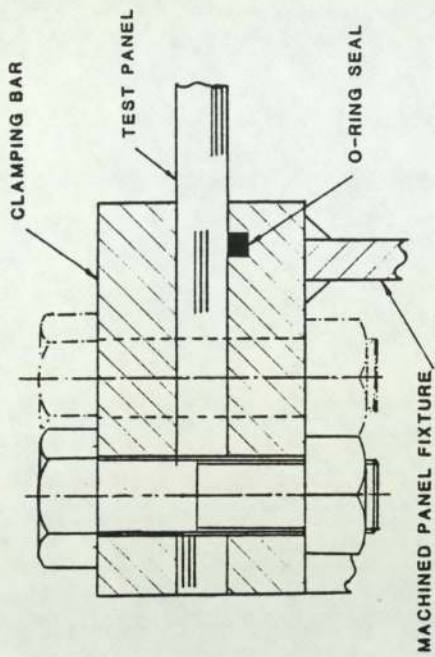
Detail of panel edge seal and clamp arrangement.
